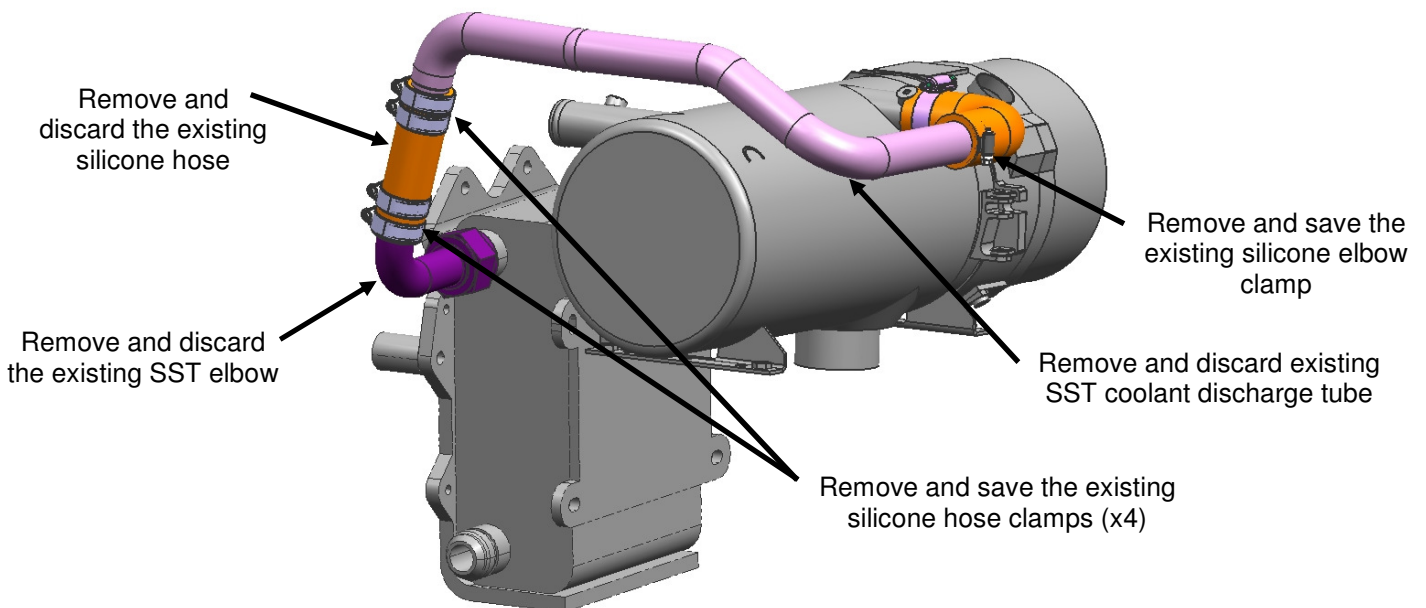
Cabin Heat Coolant Discharge Tube Removal
